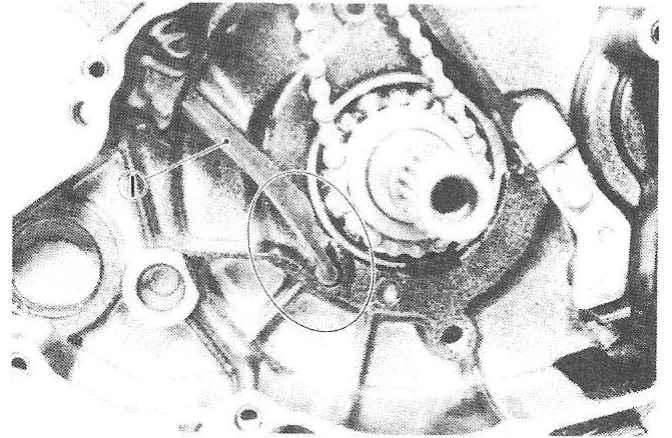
B.43 Make sure the front cam chain guide is engaged in the recess in the case (Sec 23)
